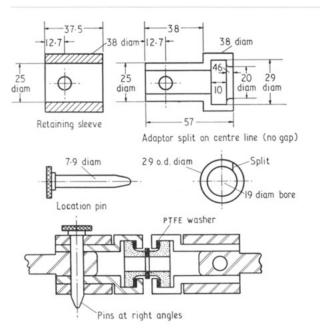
Adaptor for tensile test specimens on Hounsfield tensometer. All dimensions in millimetres
